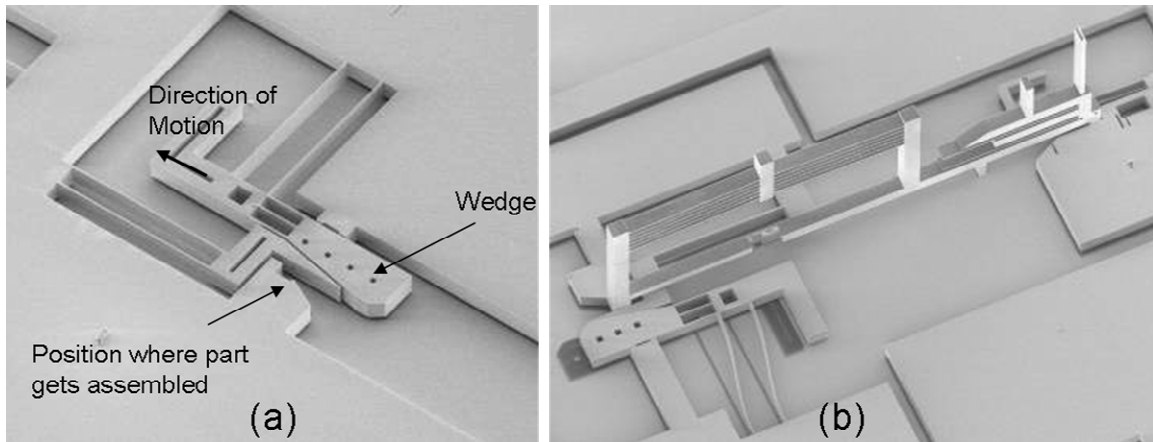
Clamp socket. (a) clamp as fabricated, (b) clamp after assembly. Shadow from gold deposition shows location of wedge before it is engaged.
